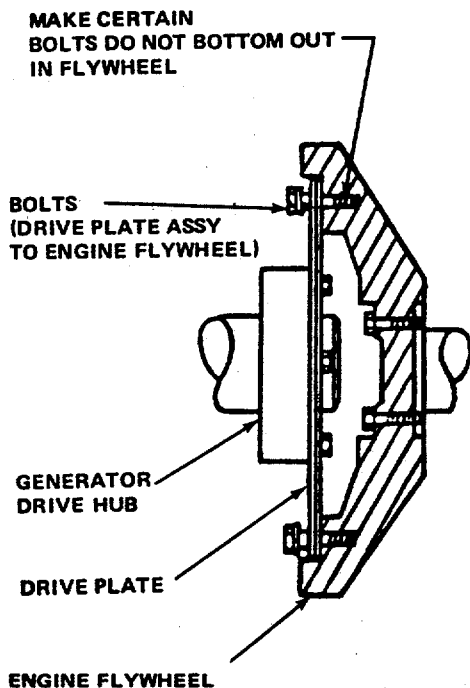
Drive Plate Assembly and Engine Flywheel Housing
